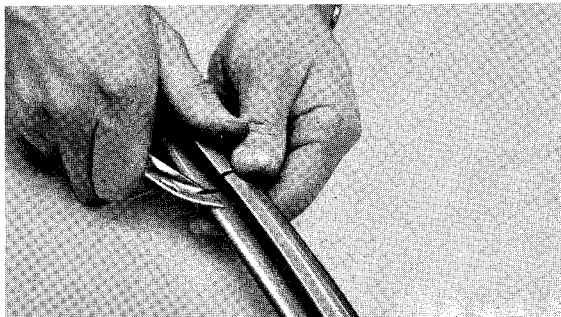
shows the start of the welding process: The surface areas to be joined are pressed against the hot welding blade until the material visibly begins to go soft.
